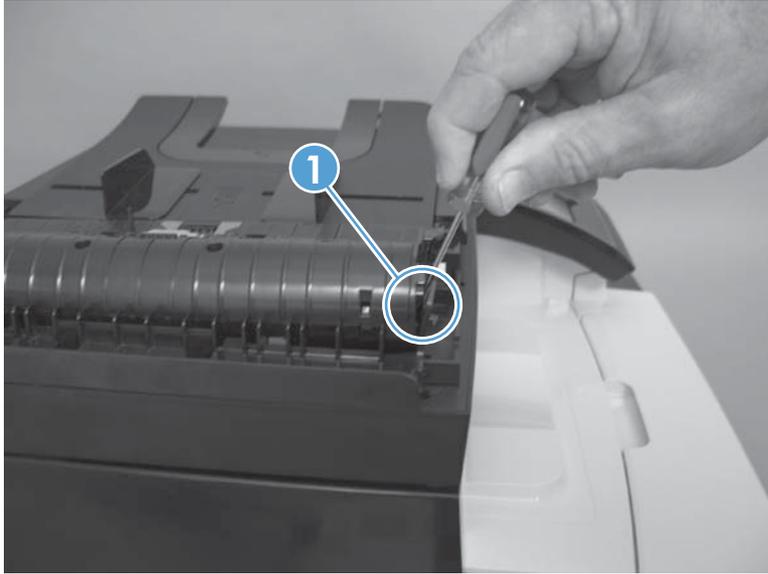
Remove the document feeder core assembly (2 of 3)
